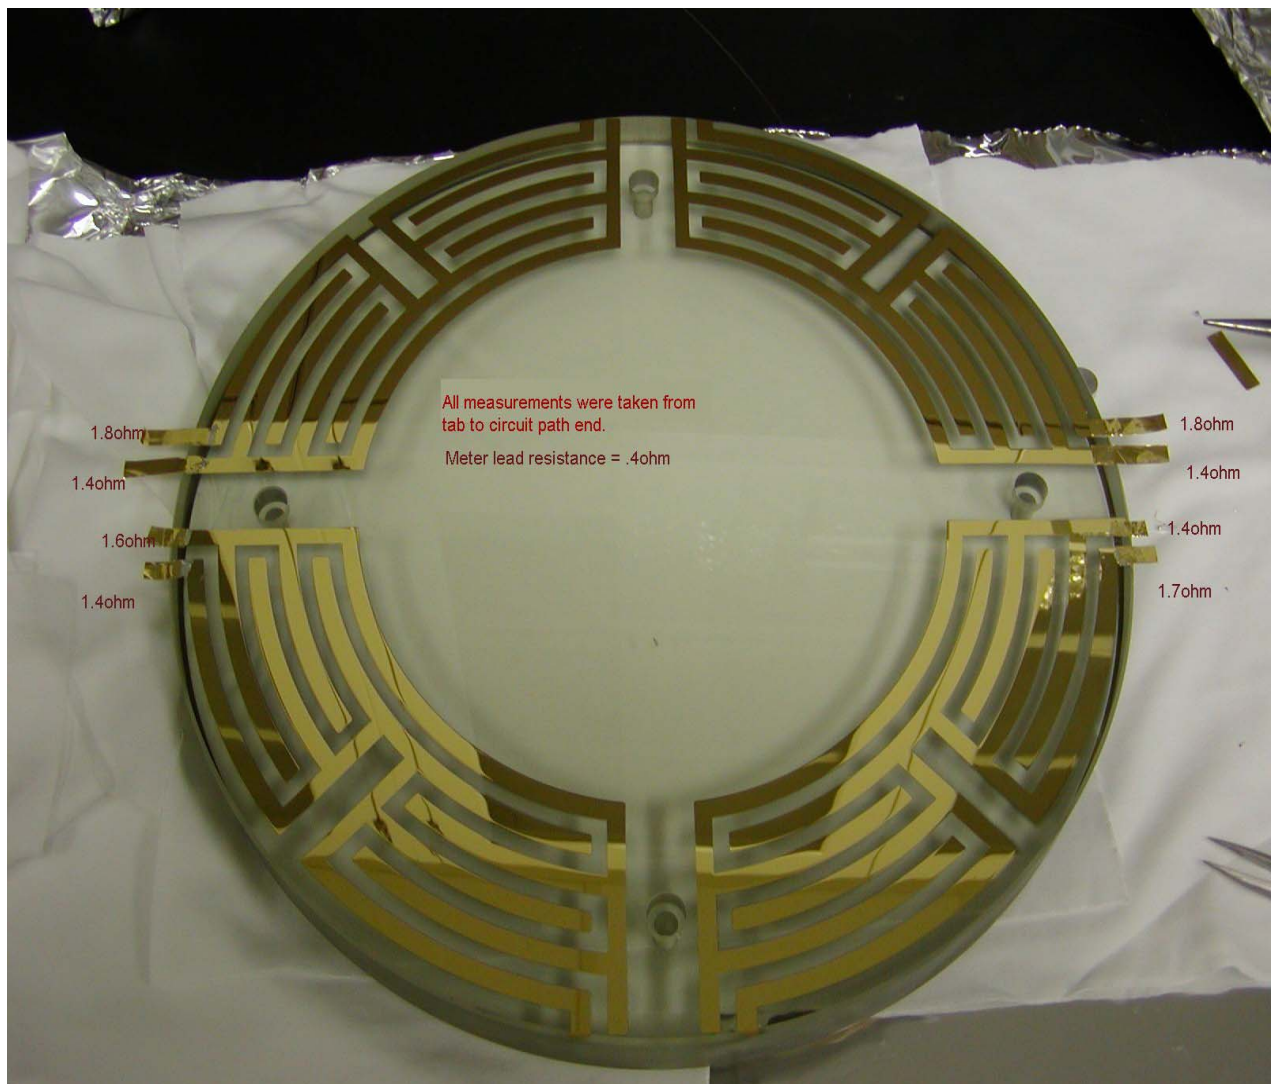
Photograph of the gold coating on the face plate, LIGO-D040052.
